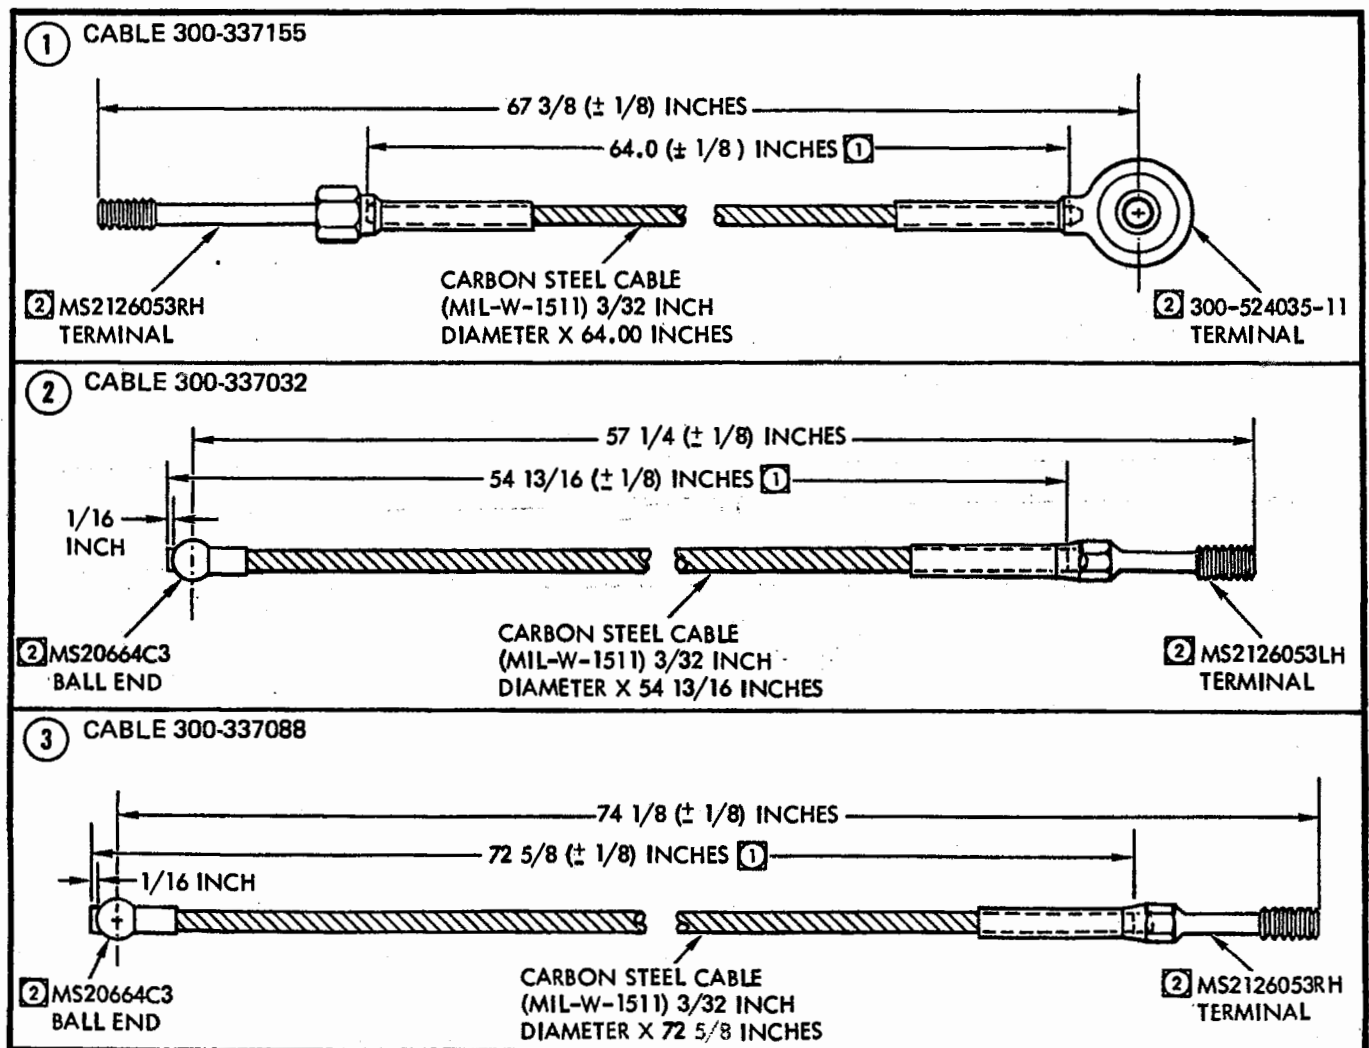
Landing Gear Control System Cable Fabrication (Sheet 1 of 2)
